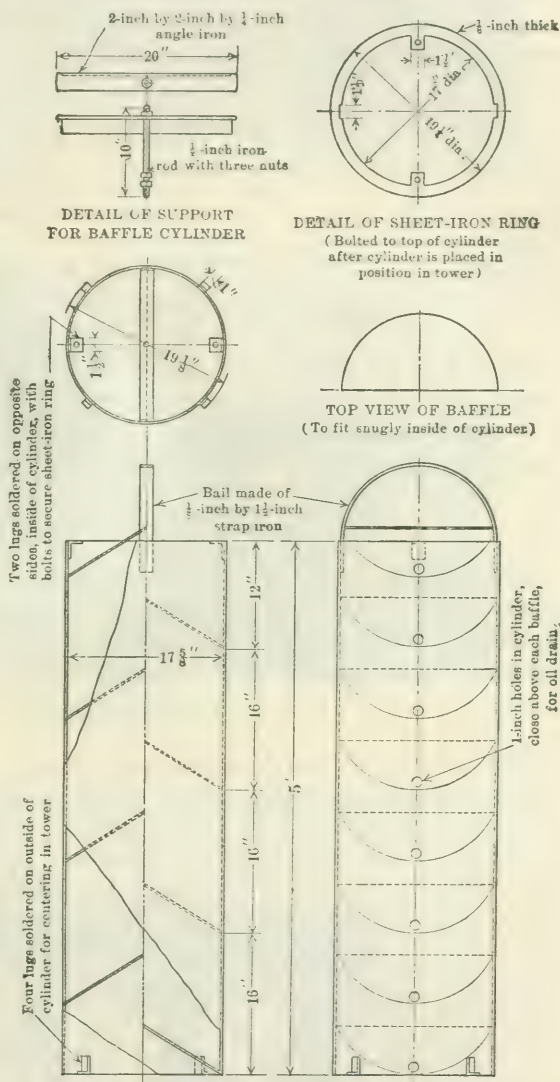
Oil trap, placed inside of tower. Cylinder and baffles made of 16-gage galvanized sheet iron; baffles soldered to cylinder.
